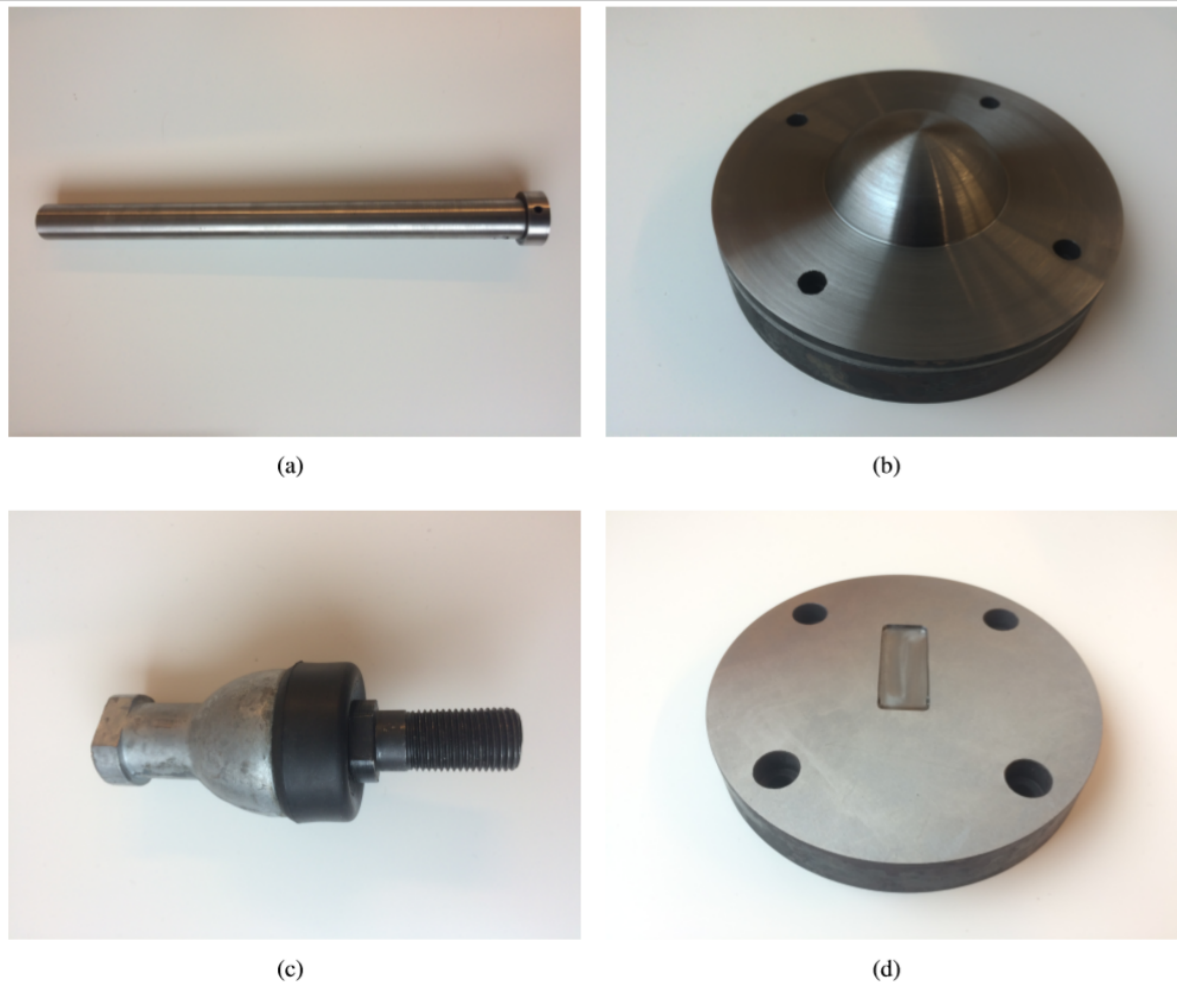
A set of four parts of the ASTM F2077 set-up: (a) Push-rod; (b) minimal friction sphere; (c) ball and socket joint; and (d) steel block [49].
